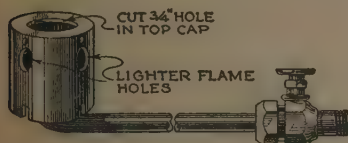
A gas range lighter improved by cutting a hole in the cap.
